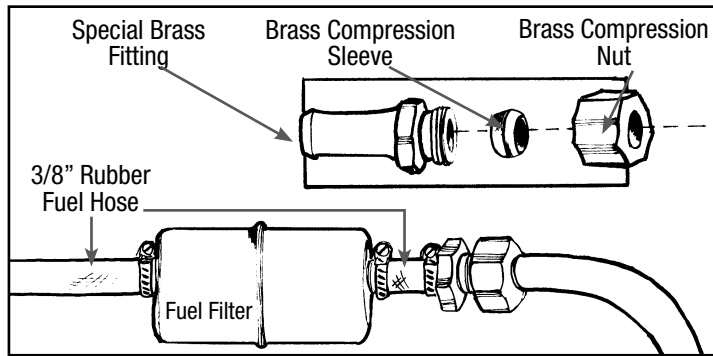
Fuel Line Kit Installed on Stock Steel Line
